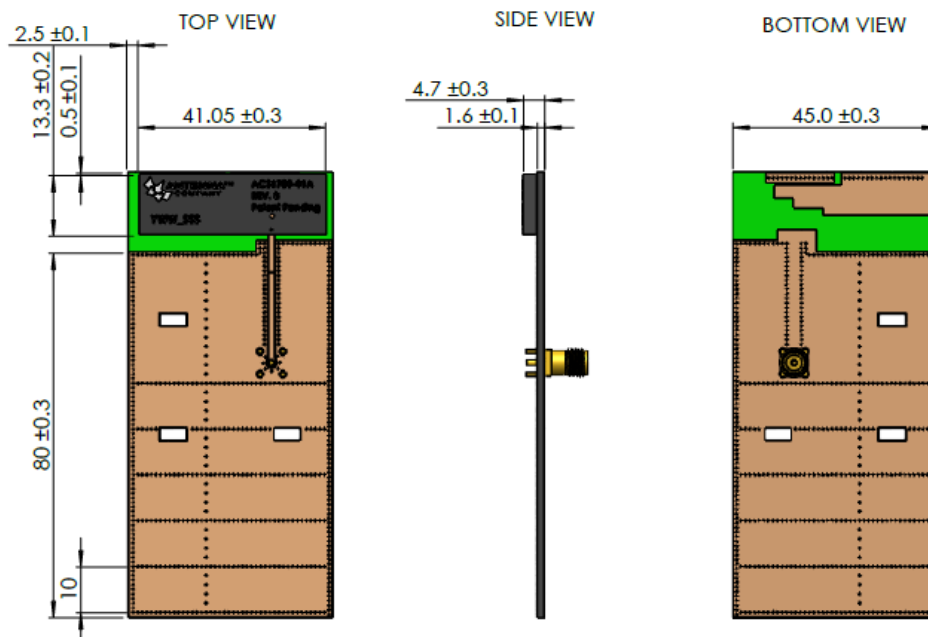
Illustration of the AC31700-01A integration on the top-, side- and bottom-surface of the host PCB
